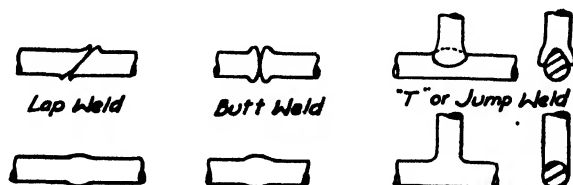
Preparation and Completion of Forge-Welded Joints.
